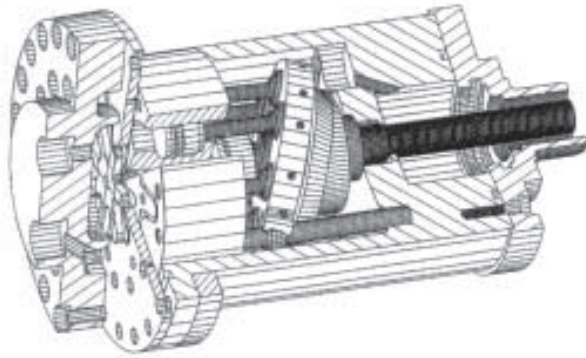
Wobble plate compressor test model no. 1 produced by Danfoss A/S, DK
